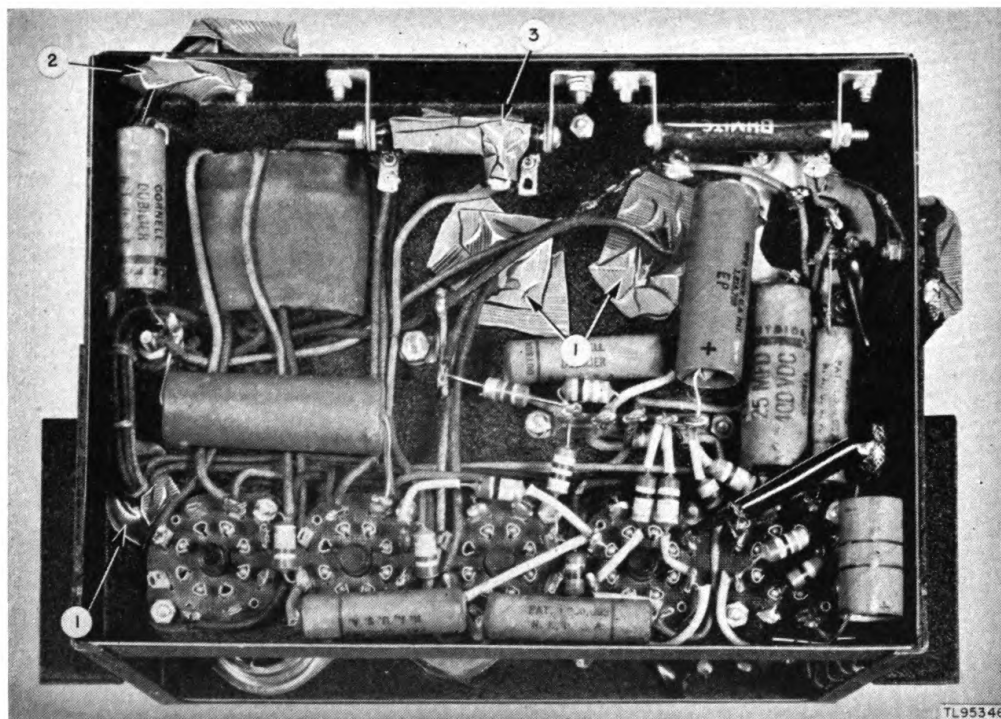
Reproducer amplifier chassis, bottom view, masking details.
